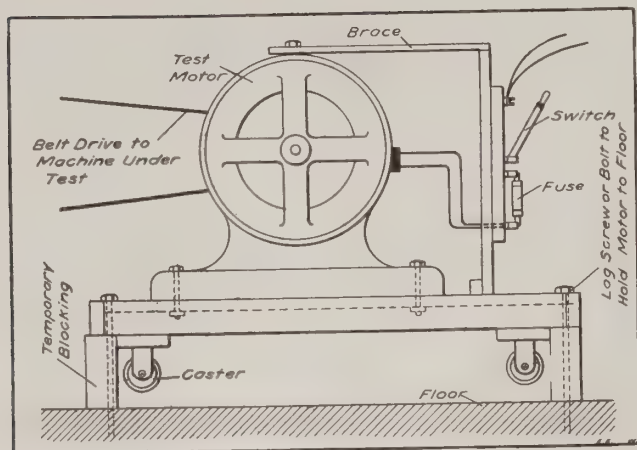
PORTABLE MOTOR ARRANGED TO TEST POWER REQUIRED BY MACHINE TOOLS.
